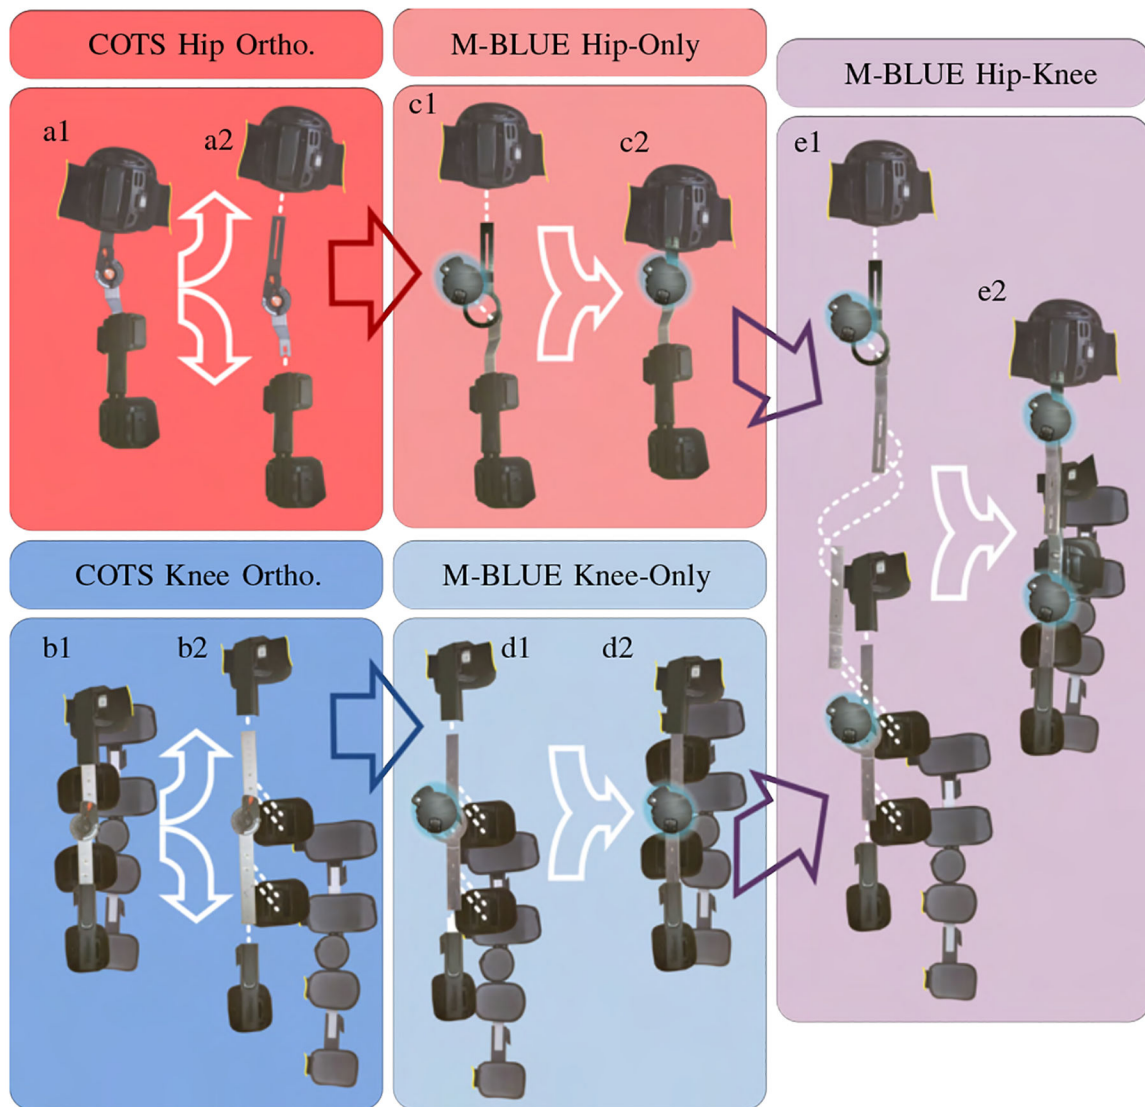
Modular Backdrivable Lower-limb Unloading Exoskeleton (M-BLUE): a1-2) Commercial off-the-shelf (COTS) T-Scope Hip brace disassembly, b1-2) COTS T-Scope Knee brace disassembly, c1-2) M-BLUE hip-only assembly, d1-2) M-BLUE knee-only assembly, and e1-2) M-BLUE hip-knee assembly.
